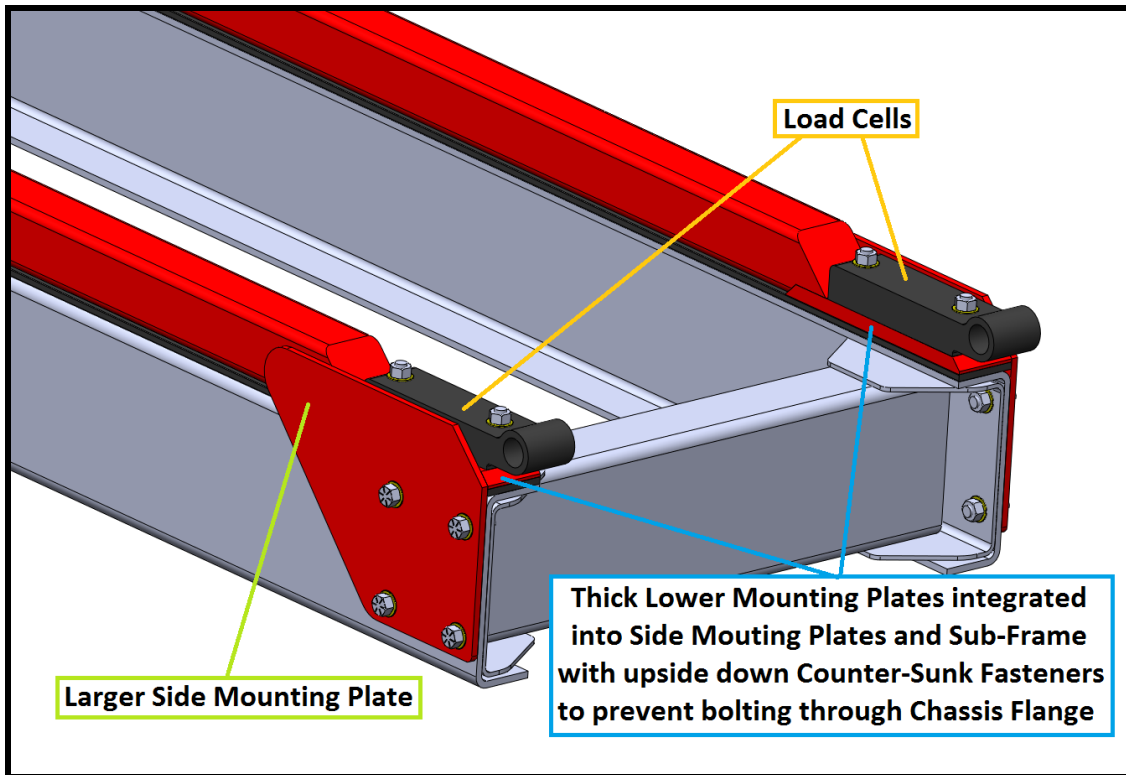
LOAD CELLS WITH MODIFIED SUB-FRAME, LOWER MOUNTING PLATES AND LARGER SIDE MOUNTING PLATES
